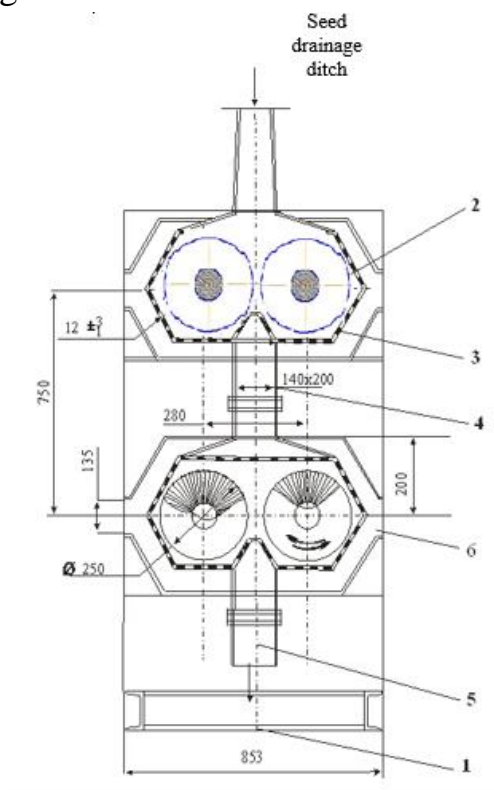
Side view of the improved seed cotton delinting machine developed according to the proposed technical solution
